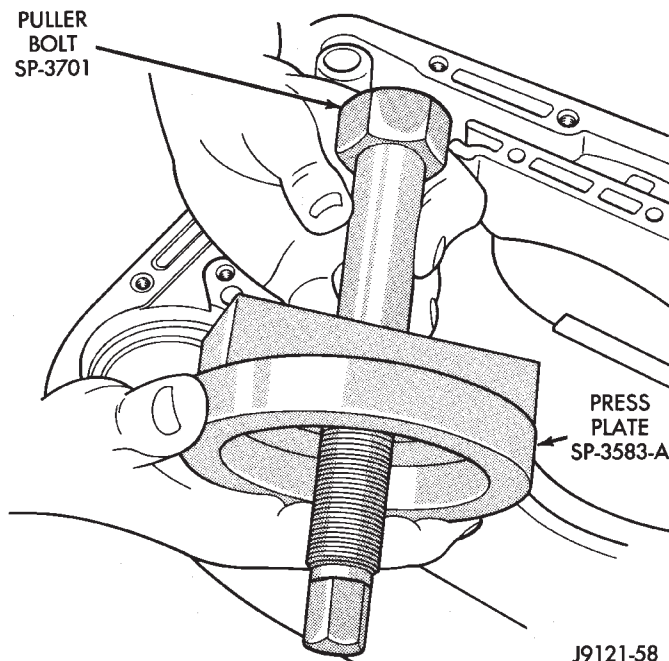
Assembling Clutch Cam Puller Bolt And Press Plate
